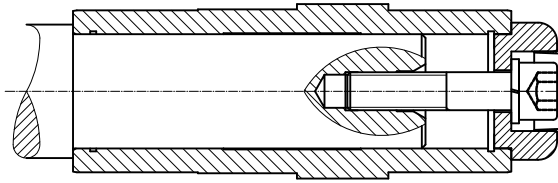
Gear unit mounted to shaft with a shoulder using the fastening element
